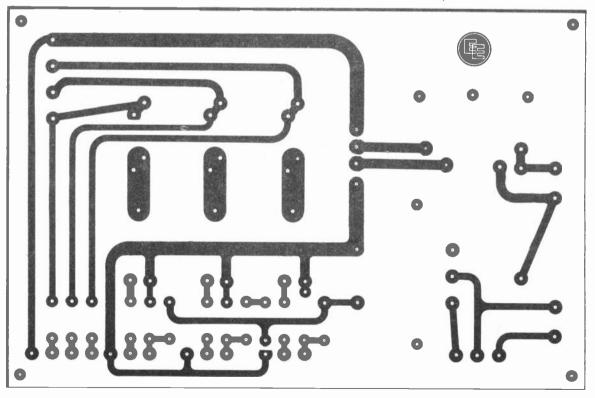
The foil pattern for the p.c.b. This is reproduced full size.
